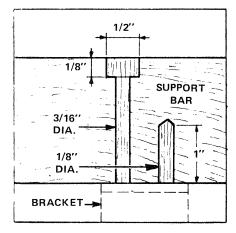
Cross-section view of mounting hole (Bracket mounted to BOTTOM of the Bar).
